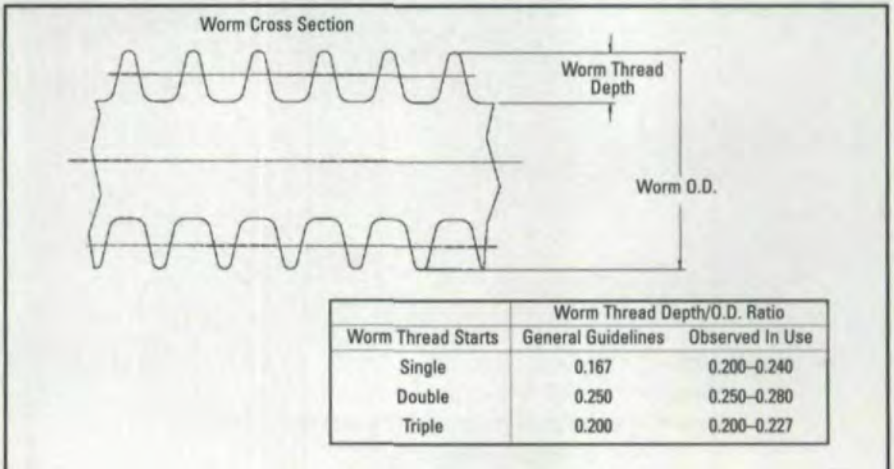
Rolled worm thread depth and outside diameter guidelines.
